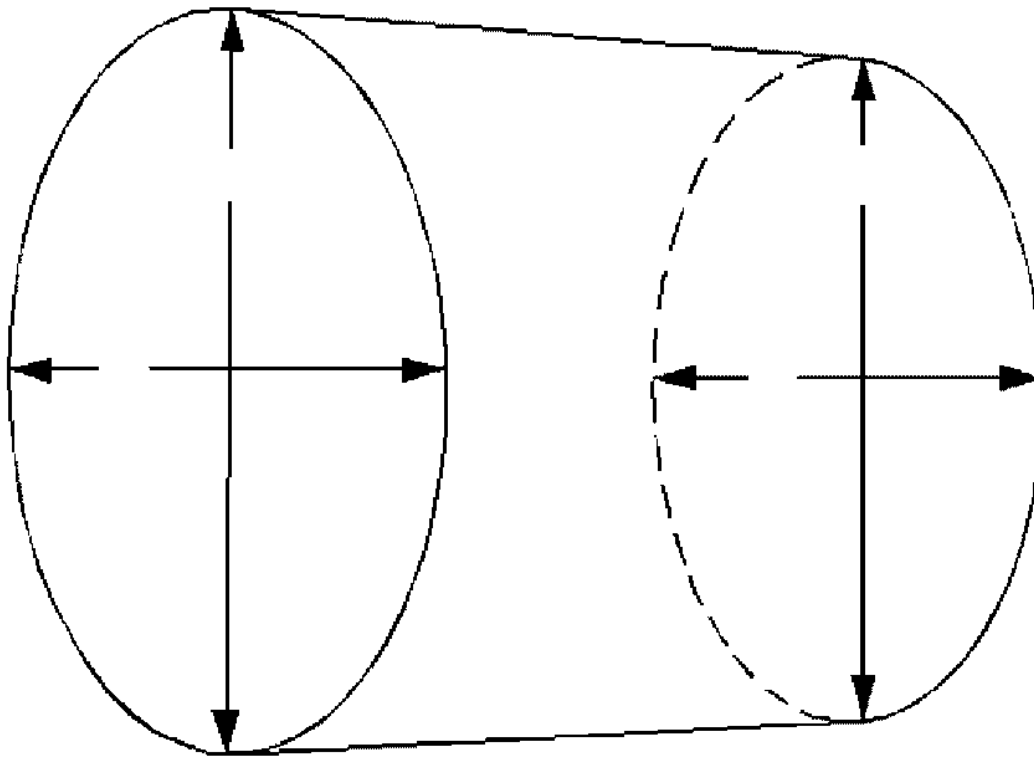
View Of Crankshaft Main Journals & Outside Micrometer
